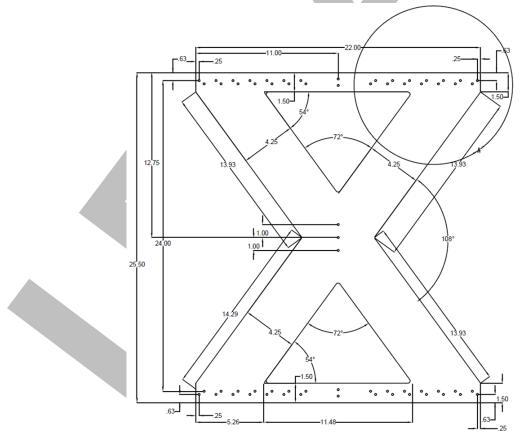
Shear-X[™] 24" Bracket Dimension Details
